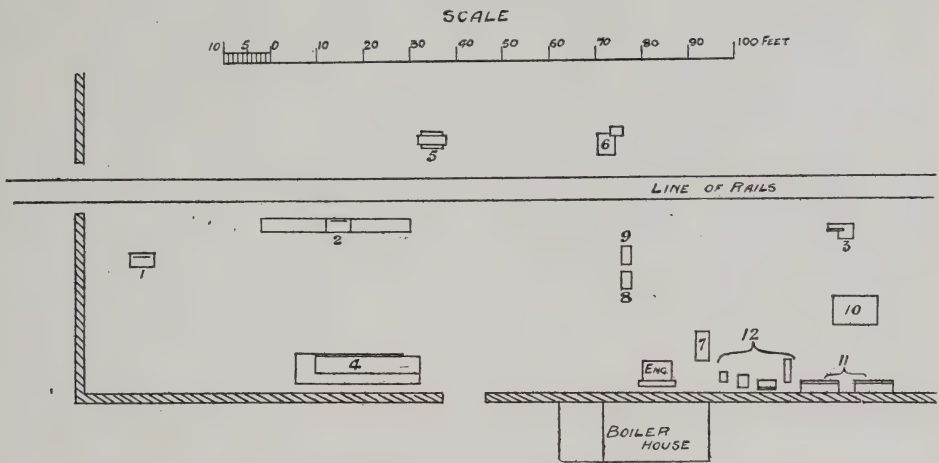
ARRANGEMENT OF WOOD-WORKING MACHINERY.
